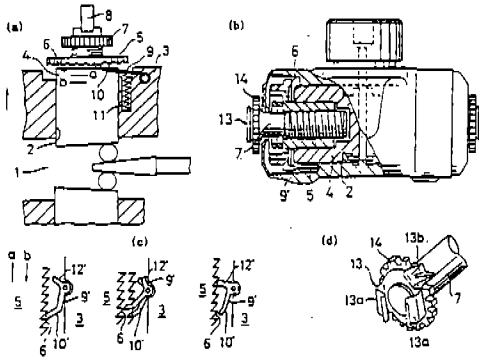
(a) A conventional automatic adjuster device applied to wedge brake, (b) An automatic adjuster applied to the hydraulic operated drum brake, (c) Detail views showing the operation of adjuster lever, (d) An oblique view showing an adjuster screw(Akebono Brake Industry Co. Ltd.)
